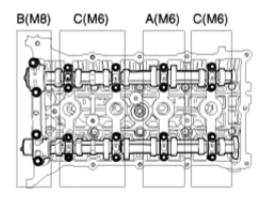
Identifying Camshaft Bearing Caps In Tightening Sequence Courtesy of HYUNDAI MOTOR CO.
